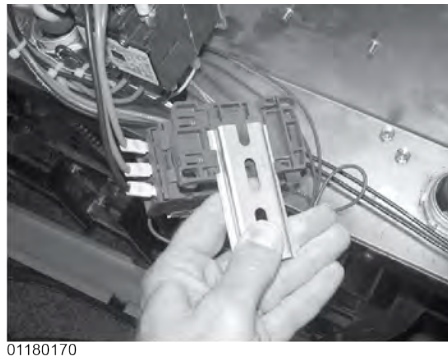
Sliding Heat Contactor Off Mounting Rail
